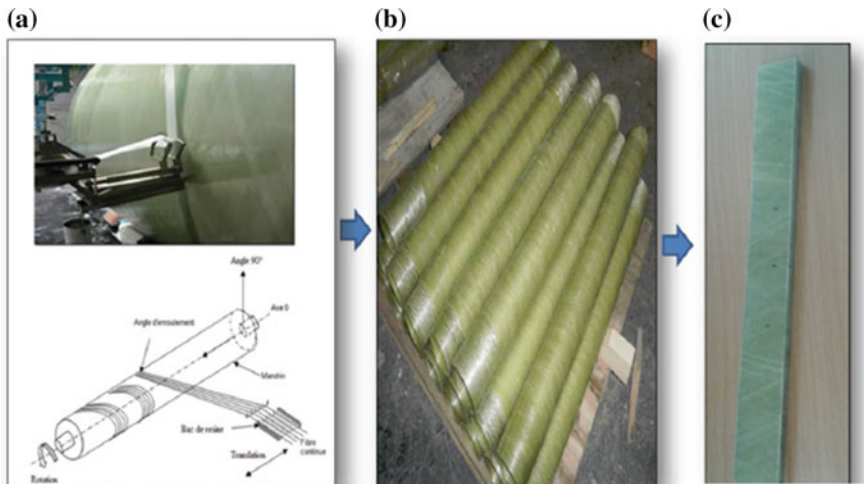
The manufacturing steps of the test specimens a Filament winding technique b The tube c The wound specimens
